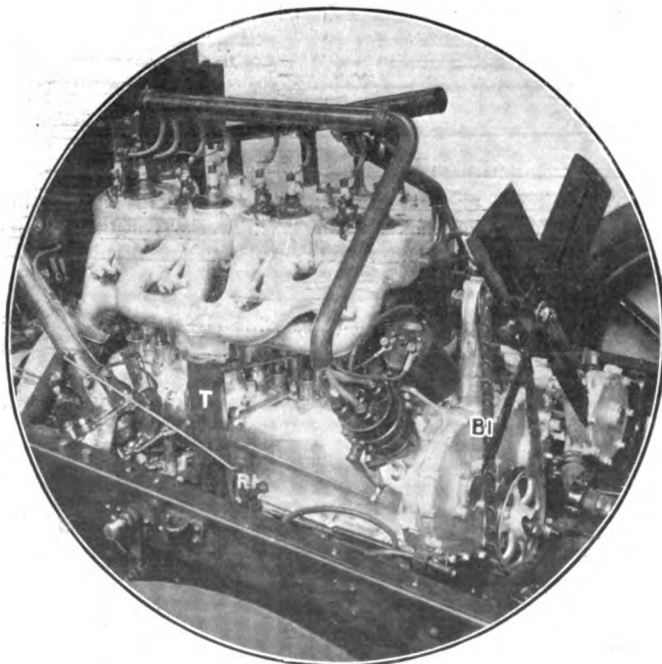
Right side of the Cadillac motor, showing the new intake manifold and supplementary ignition
